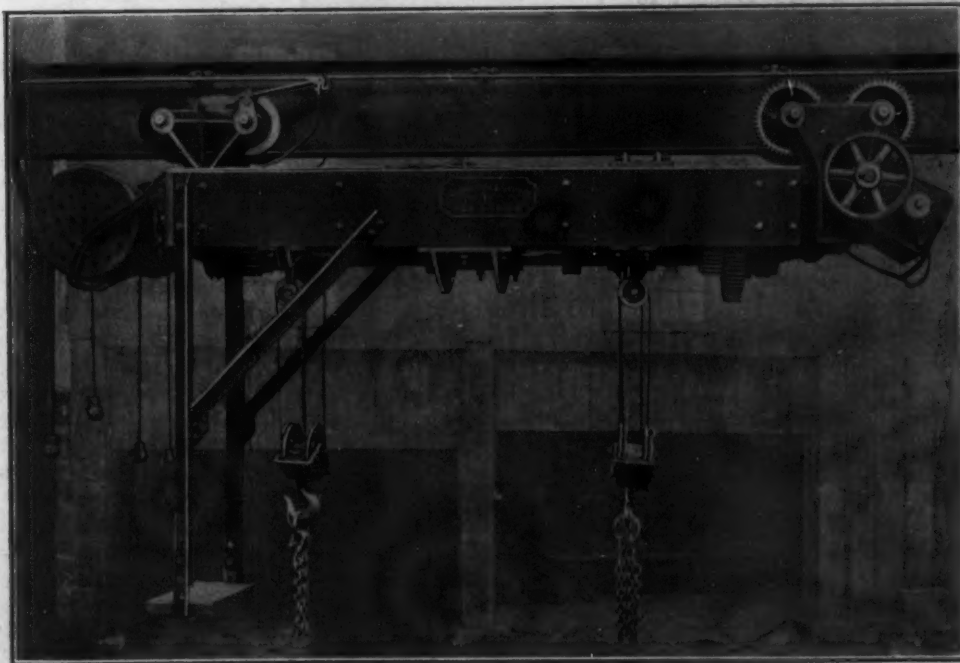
View from the Side of One of the Johnston & Jennings Double Hook Trolley Hoists.
